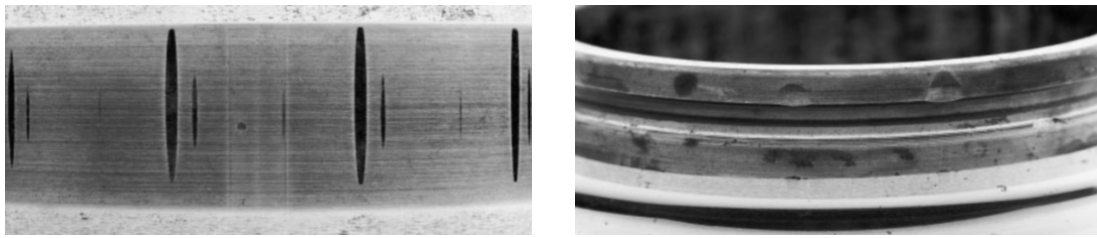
Example of a fractured outer ring, on a self-aligning ball bearing [45].
